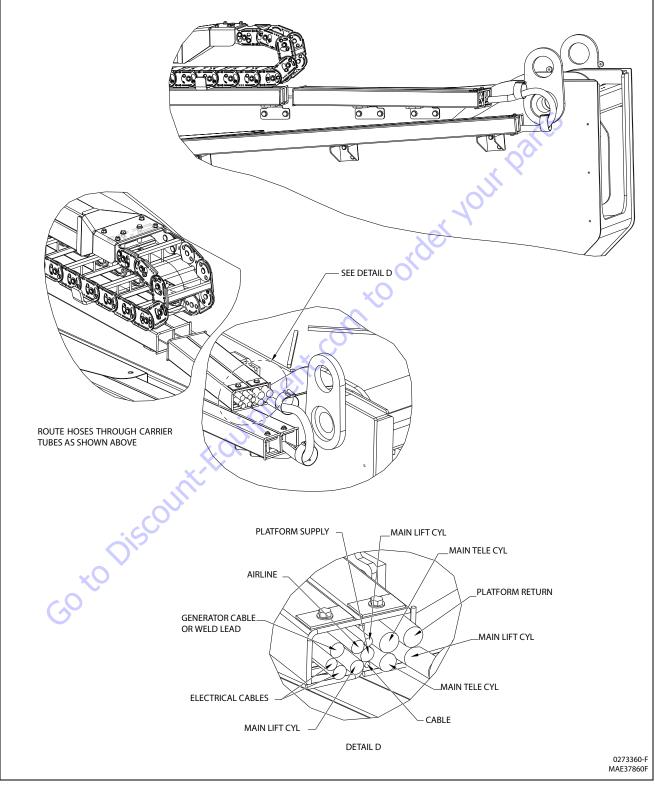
Tower Boom Powertrack Installation - Sheet 3 of 3
